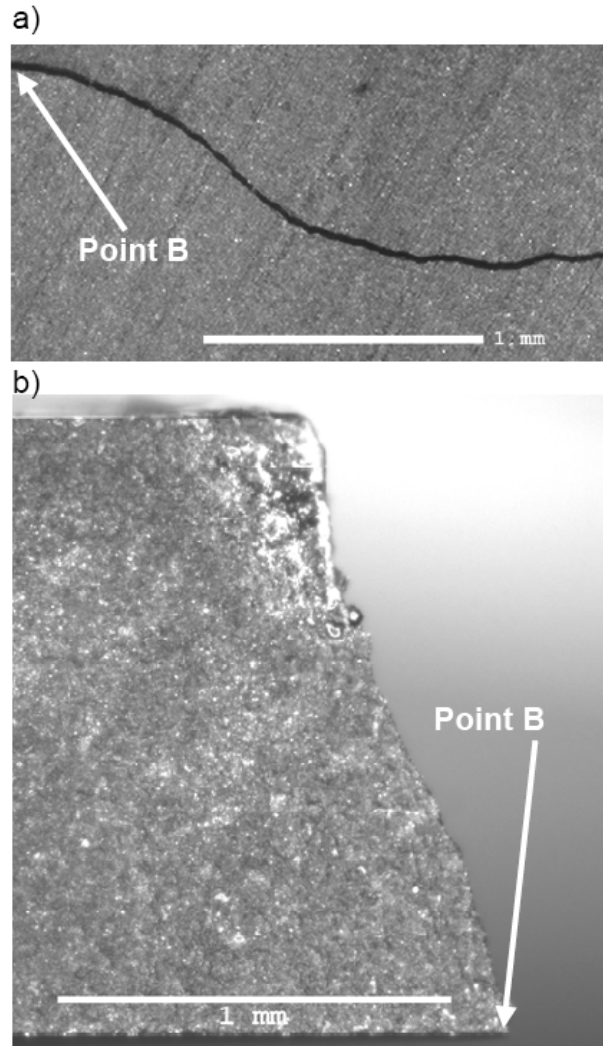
3: Undulations of crack path a) bottom view b) side view
